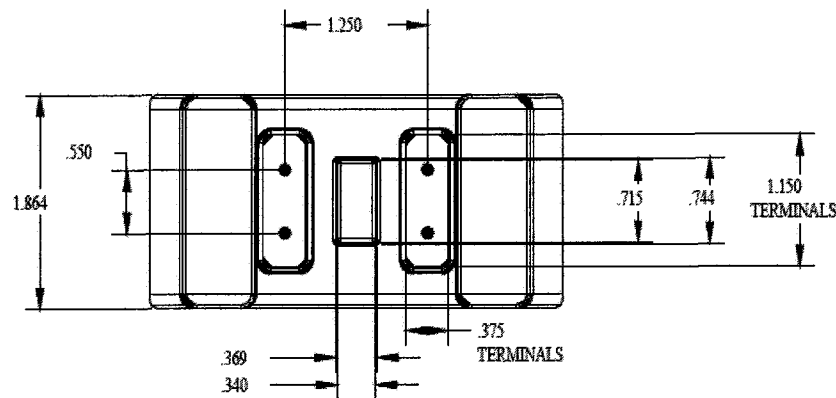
Top View Dimensions (inches) of LIB Cell Module
